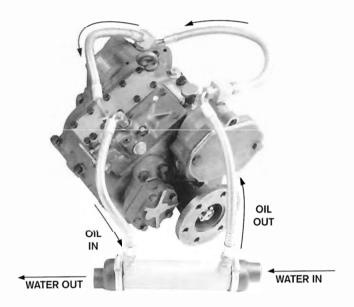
Oil cooler connections PRM750A/PRM750C with power take-off
